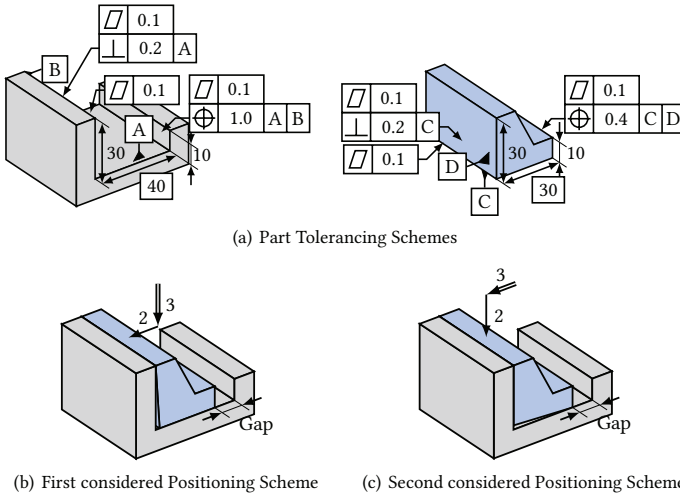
Tolerance Stack-Up considering different Positioning Schemes
